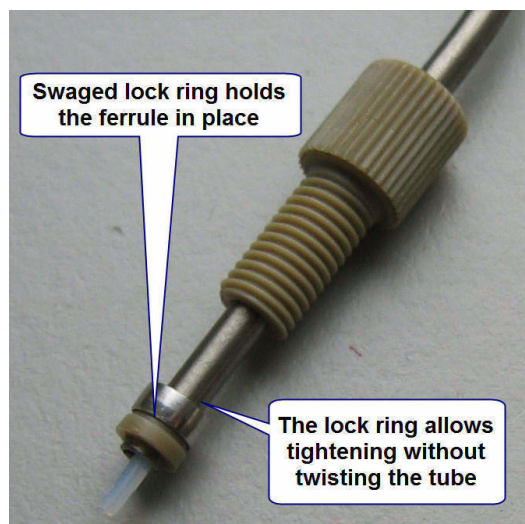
3 Fitting installed on the steel tube with 1/16" PTFE liner
